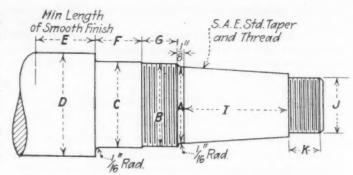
Propeller Shaft Where the Rear End of the Front Shaft Is Tapered
